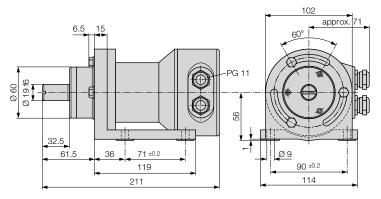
KINAX WT 707 with additional gear, screw terminals, cable glands and foot.
